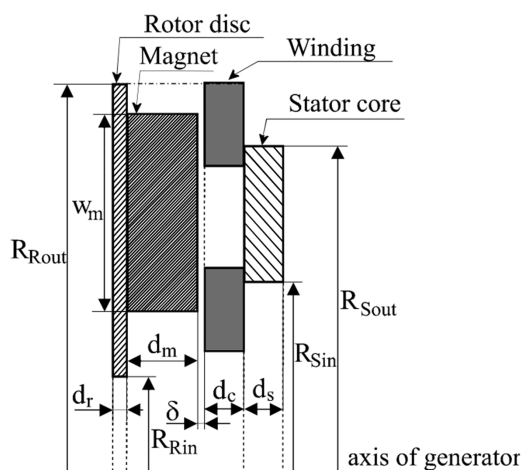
Single-stator, single-rotor topology of single-phase axial-flux magnet generator
